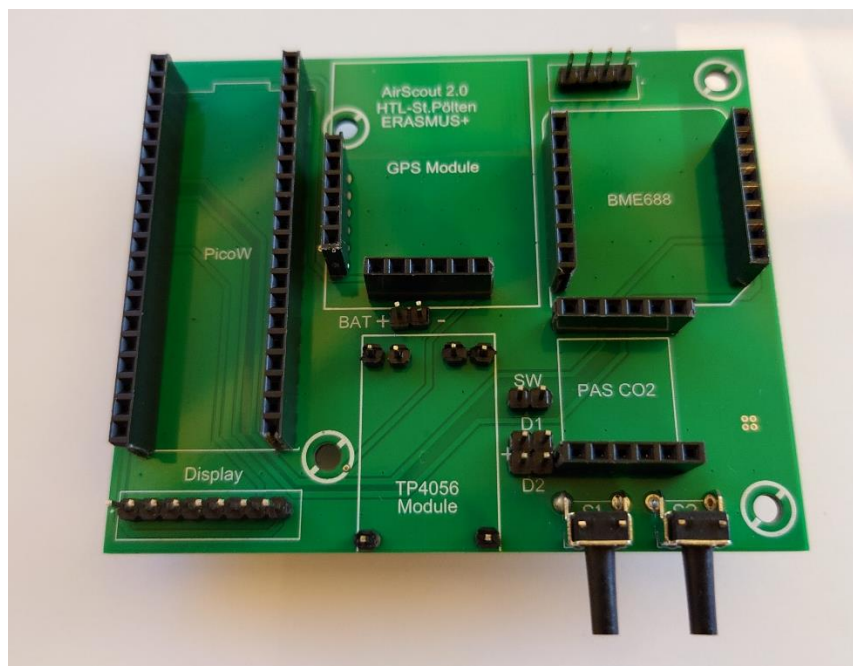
soldered Pin Headers, Socket Headers & Buttons
